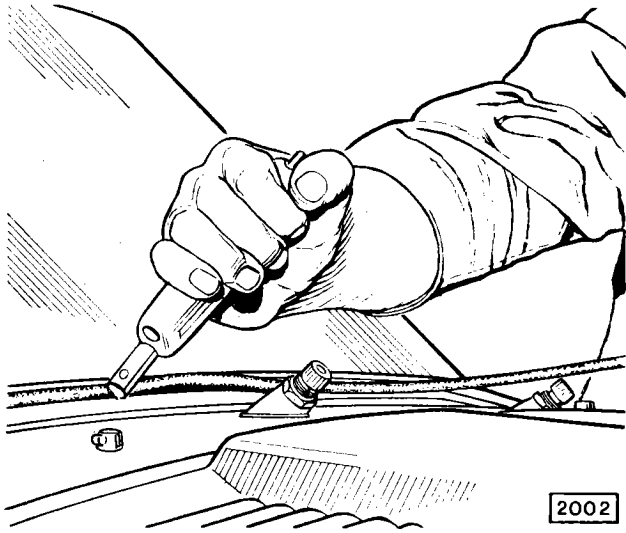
Using the special tool ("B") Fig. 16. for inserting the rubber sealing strip in the windscreen sealing rubber
